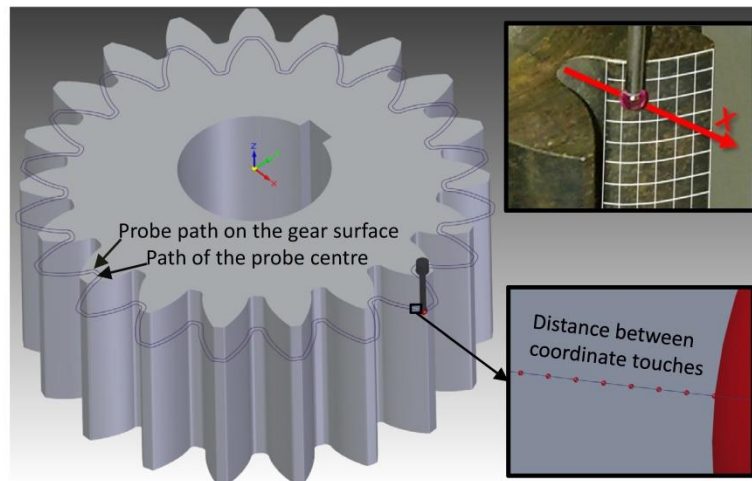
Gear measurement using a CMM (left: profile measurement; right: flank surface measurement).
